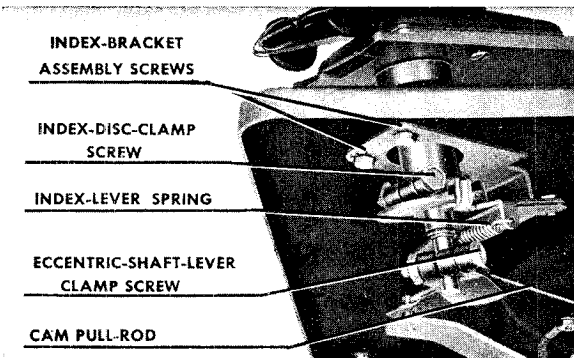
INDEX-BRACKET, INDEX-DISC, AND ECCENTRIC-SHAFT-LEVER ASSEMBLIES.
